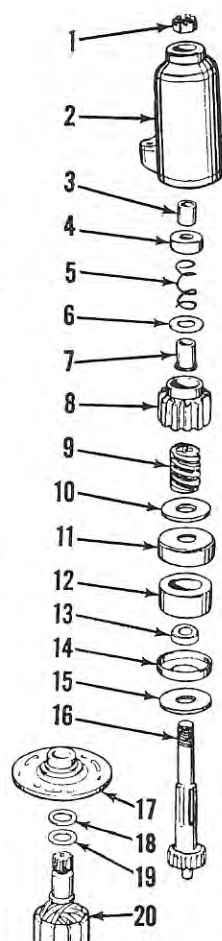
Exploded view of gear reduction starter drive used on V-4 models.
